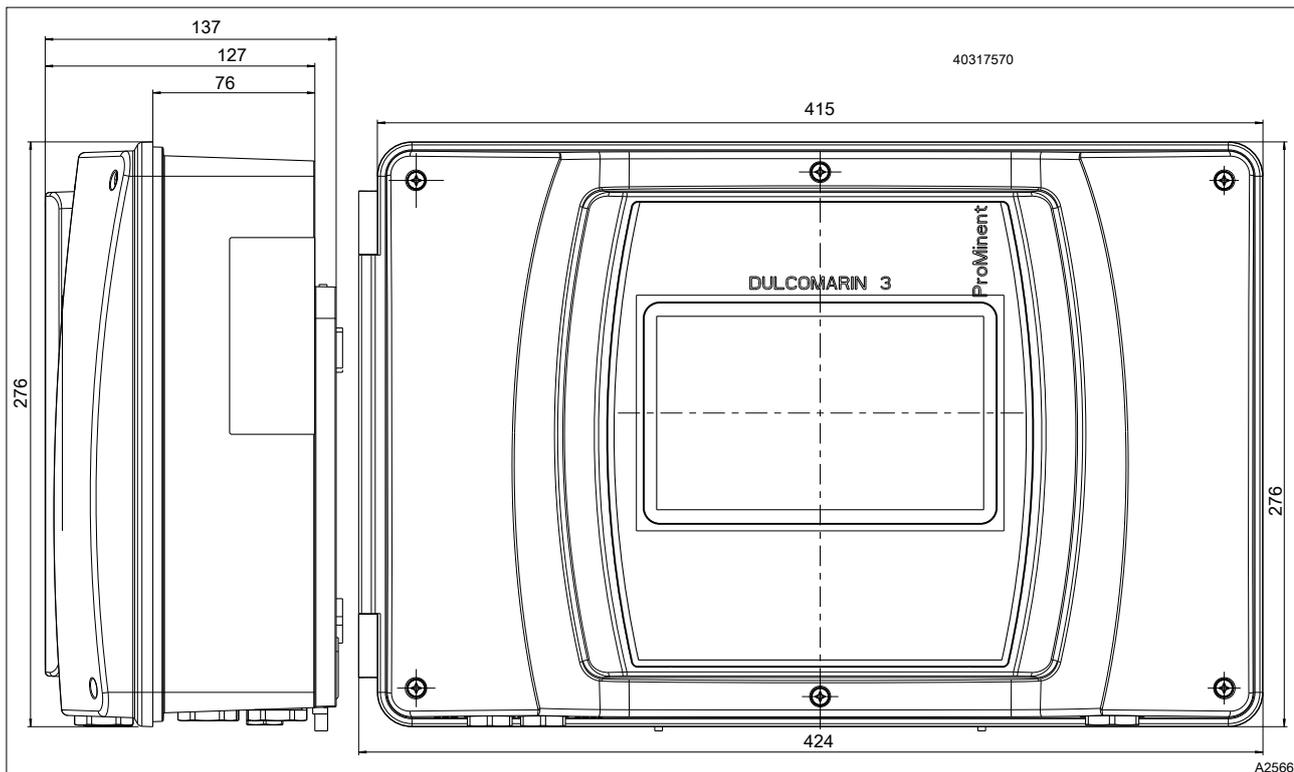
Dimensional drawing, all dimensions in millimetres.
